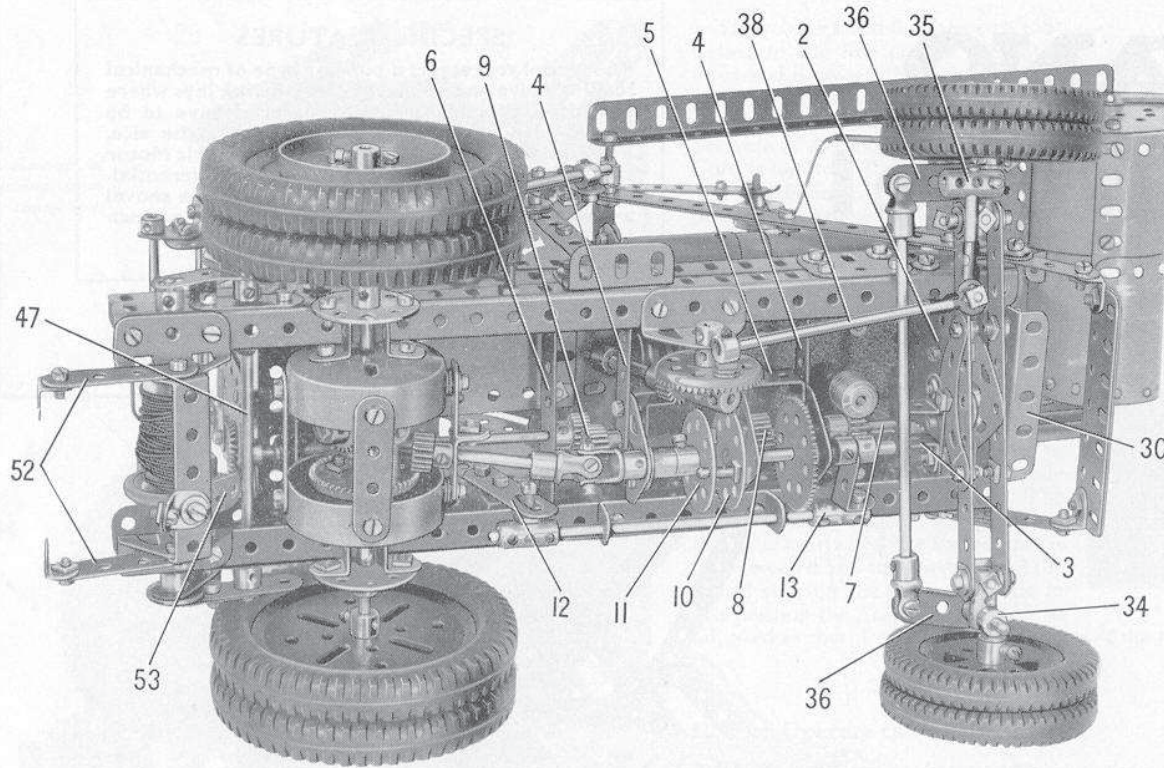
The Lifting Shovel seen from underneath, with the reduction gearing and the driving mechanism clearly shown
